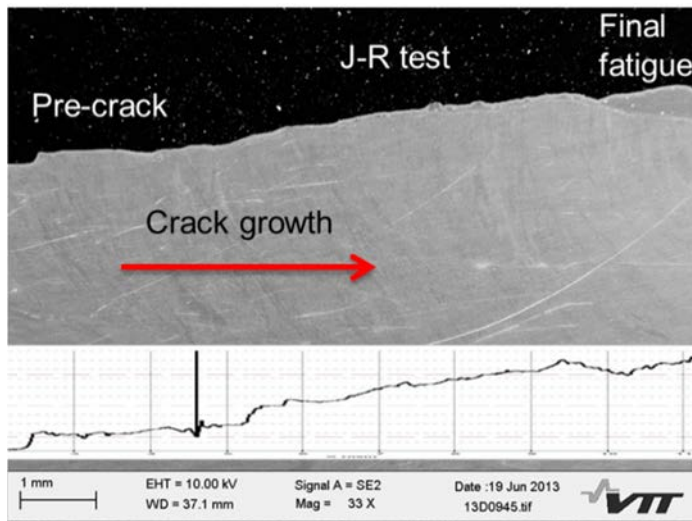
A SEM image of a detail of the polished cross-section. An example of a crack step which was widely observed in as-welded specimens during J-R testing.
